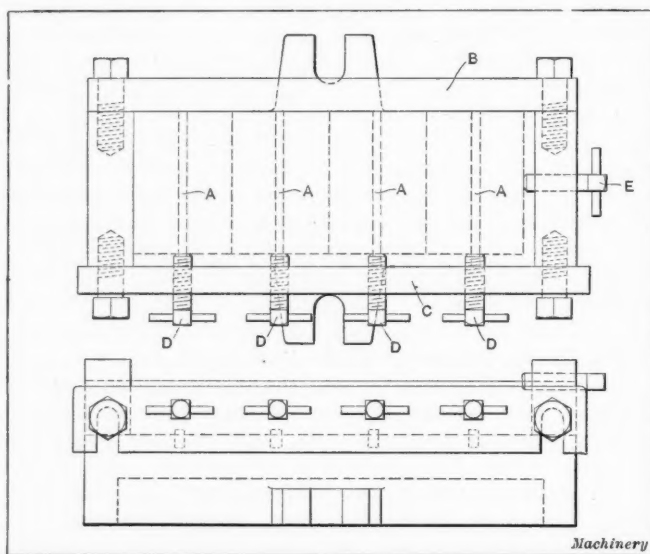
Milling Fixture for Rapid Production in splitting Cylindrical Work
